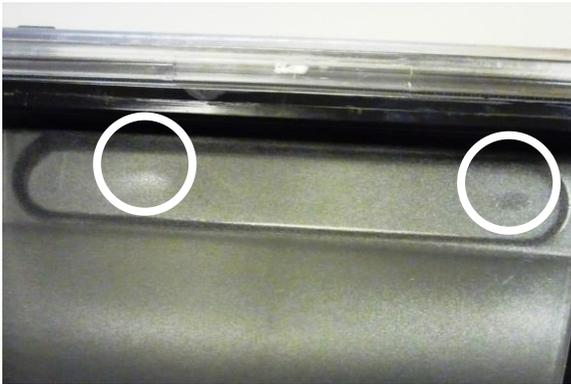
Ultrasonic Welding can cause damage to the parts texture.
